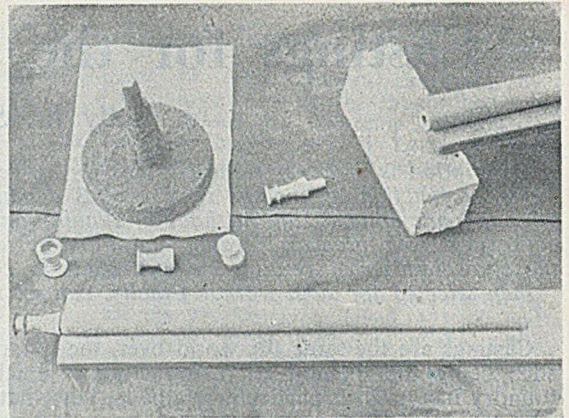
Special Chaplets and Core Supports used in Jobs such as the Power-hammer Cylinder.
